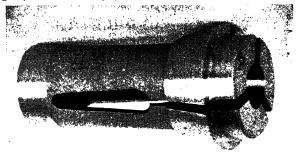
Spring collet. A spring collet is a fixture supplied in sets having a range of diameters for the intended work. This collet is used in conjunction with a tapered recess for quickly centering cylinders the outside diameters of which are just slightly less than the cylindrical recess in the jaws of the collet. As the collet is forced into the tapered recess, the parts of it forming the jaws are forced together, holding the work tightly. This type of fixture works best on cylinders that have a smooth finish and are practically right circular. (Brown and Sharpe.)
